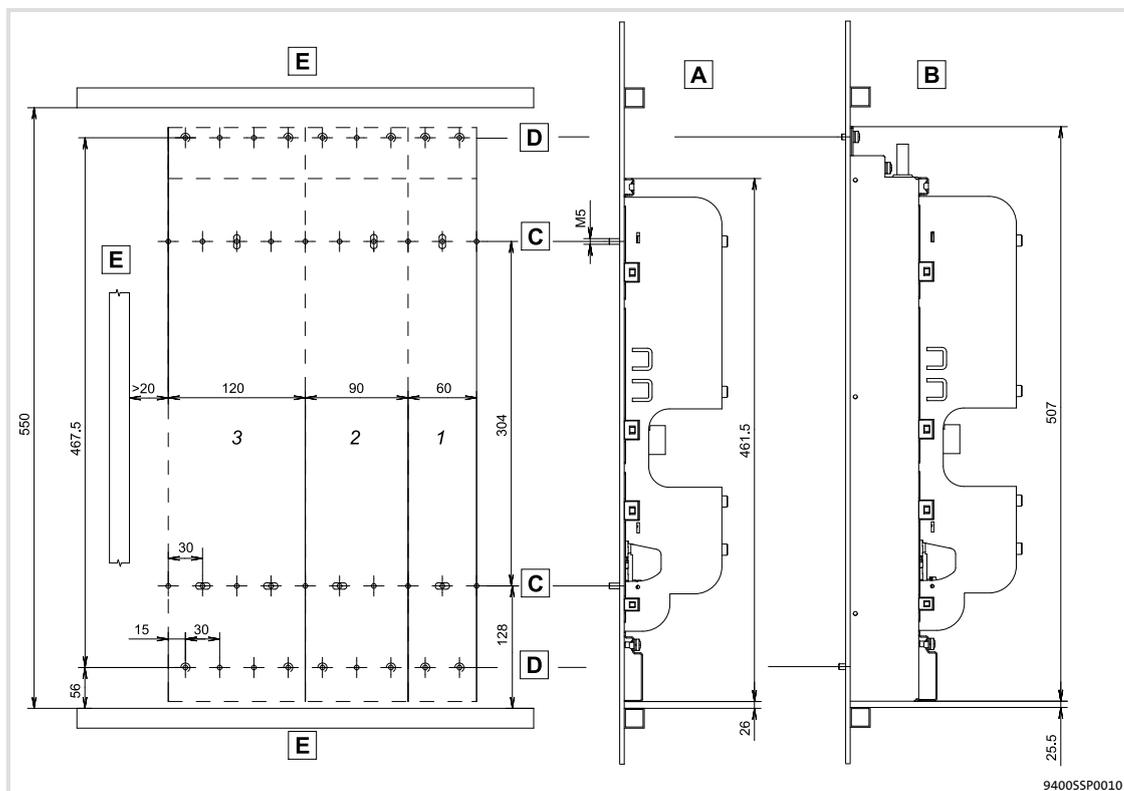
Mounting grid for installation backplane and filter of device sizes 1 ... 3
